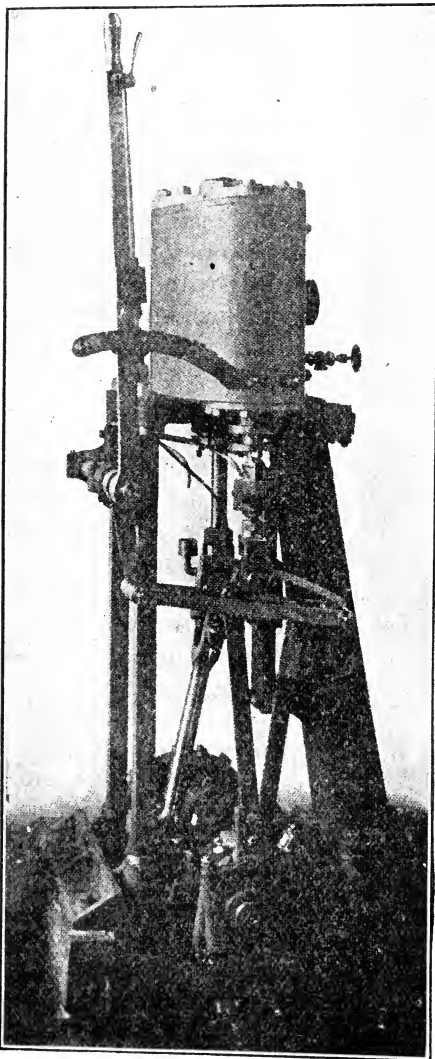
,058.—Marine Iron Works open front single cylinder tug engine, rear view; built in sizes 8×10 to 16×16.
